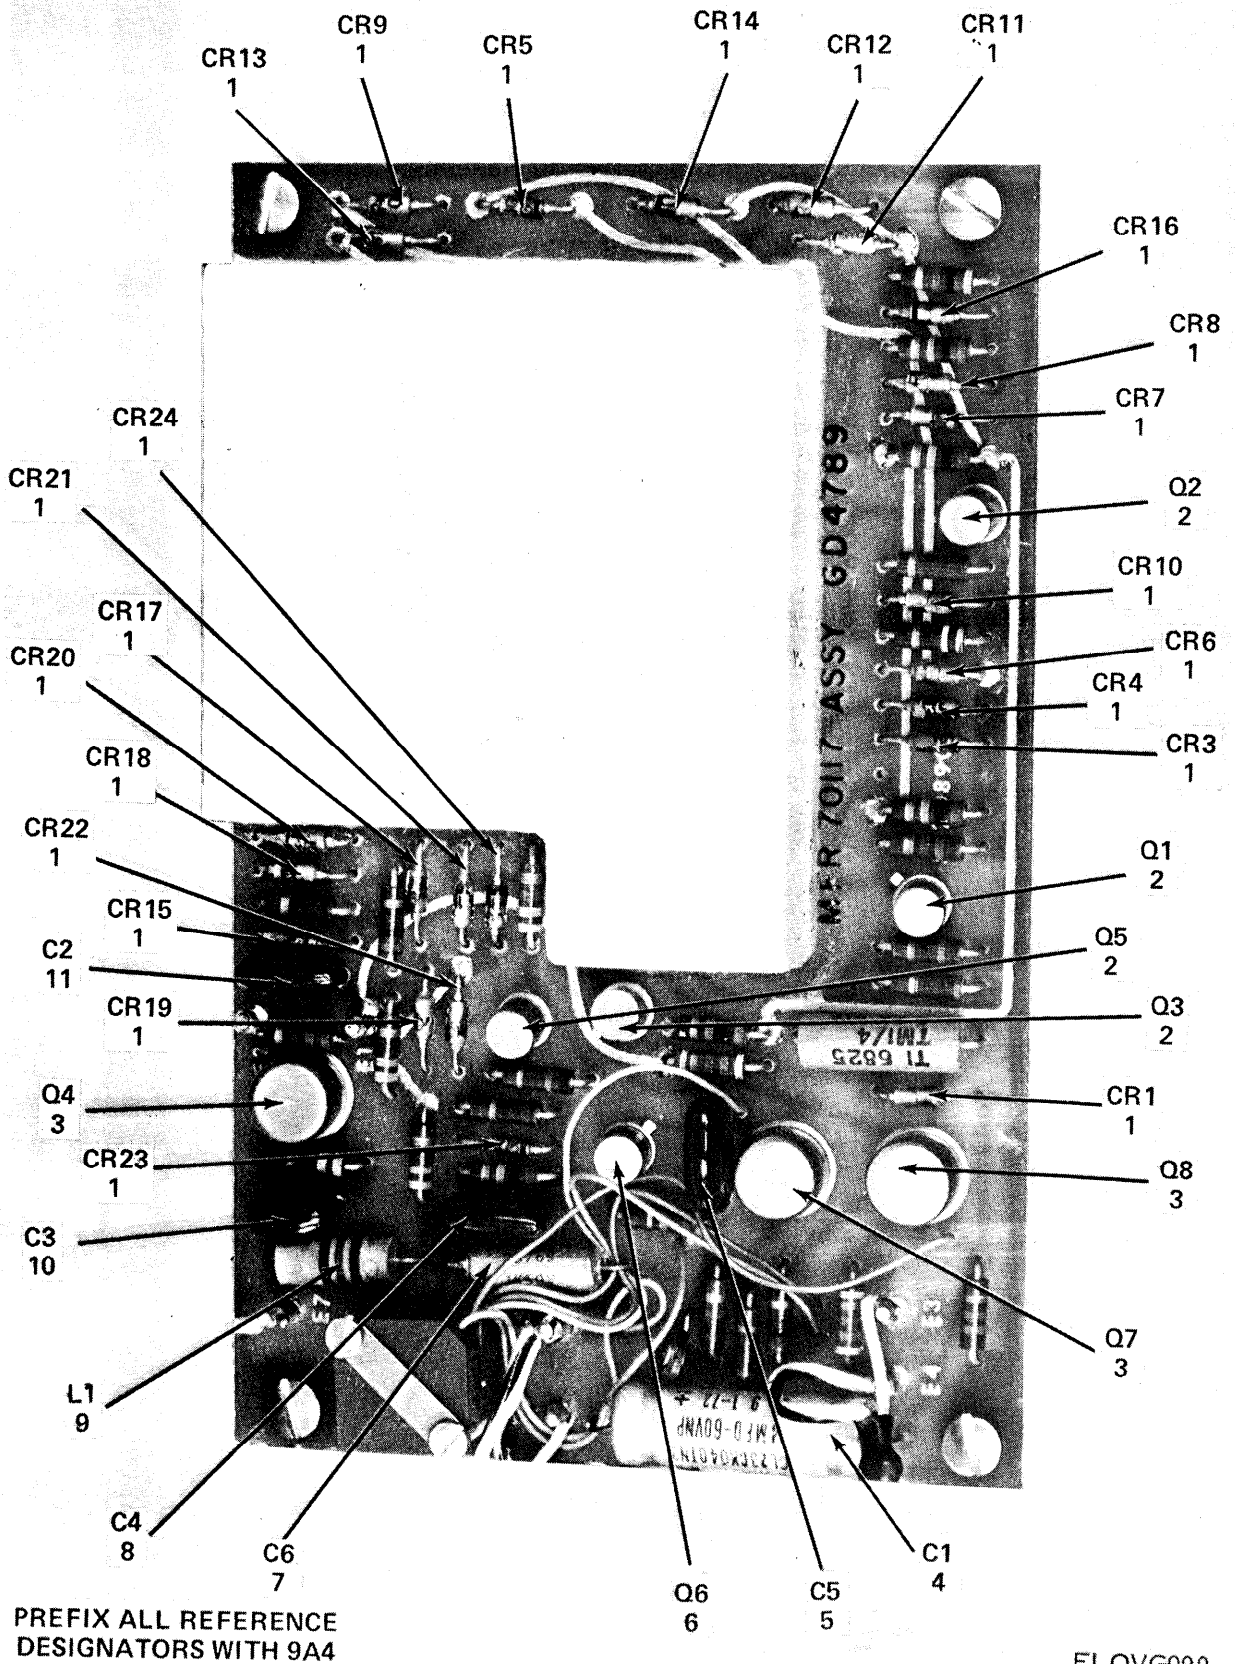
① Calibrate control assembly (sheet 1 of 2).
